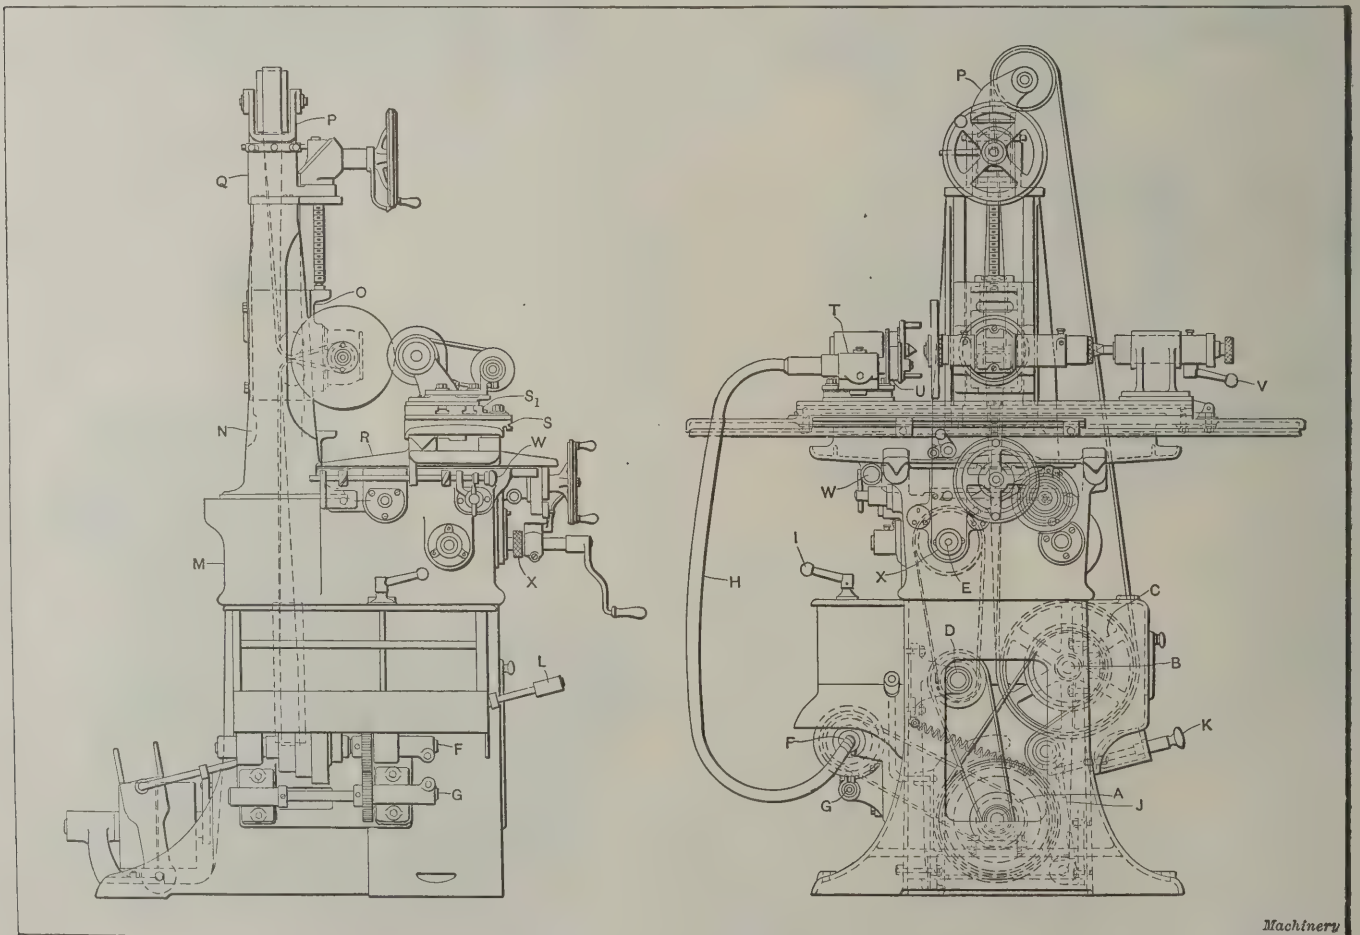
Showing Course of Spindle Driving Belt for Various Positions of Grinder Head
